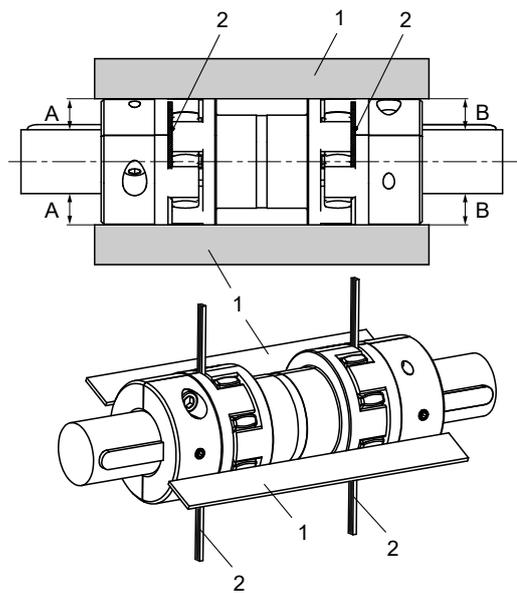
Double Cardan spacer-type coupling, checking the coupling alignment
